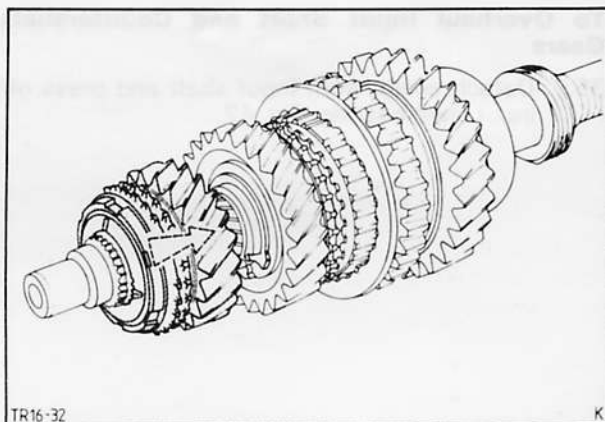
Slide 3rd gear and synchroniser ring onto mainshaft
